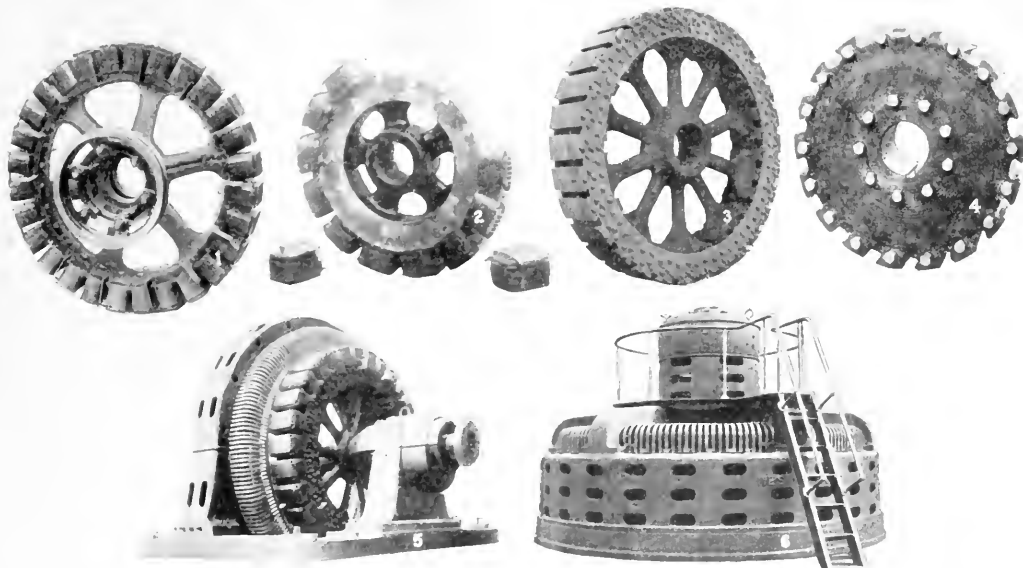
Waterwheel Generator Rotor, Cast Spider and Dovetailed Poles. Fig. 2. Waterwheel Generator Rotor, Laminated Rim and Dovetailed Poles. Fig. 3. Complete Waterwheel Generator Rotor, Plate Spider and Dovetailed Poles. Fig. 4. Horizontal Westinghouse Waterwheel Generator: Frame Shifted Over, Exposing Rotor. Fig. 5. Frame Showing Armature Windings for Westinghouse Horizontal Waterwheel Generators. Fig. 6. Vertical Westinghouse Waterwheel Generator.
